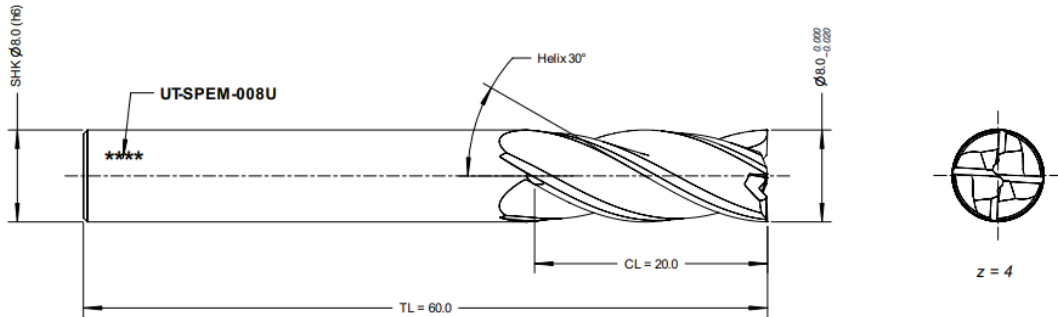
Drawing of end mill carbide with diameter 8mm, 4 flutes and helix angle 30°
